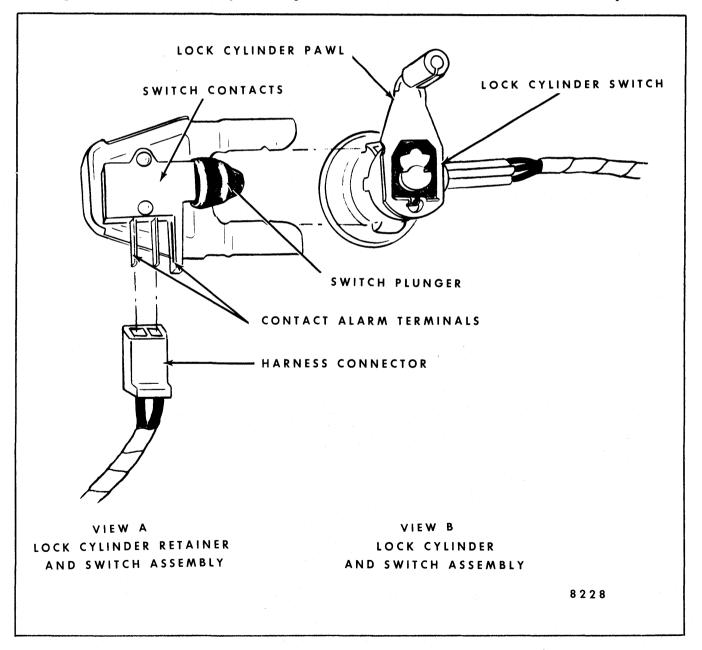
Front Door Lock Cylinder Switch Assemblies
